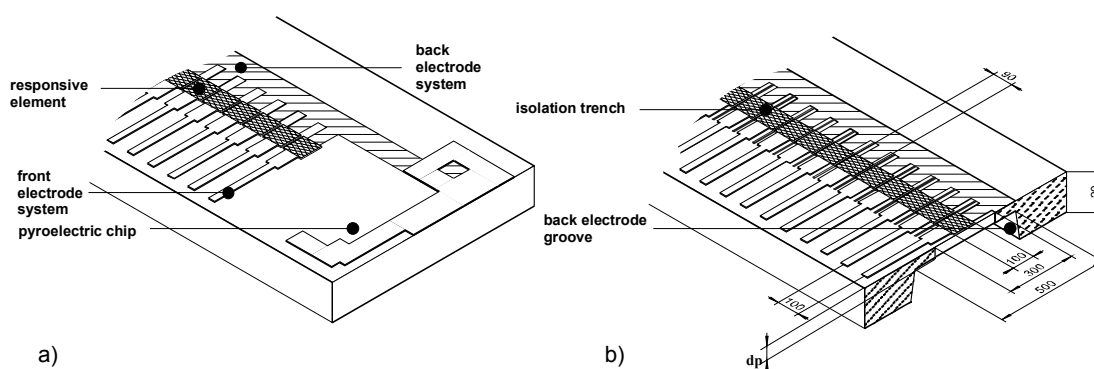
Chip layout with typical dimensions (µm) a) standard chip (only mechanical polishing) b) ion-beam-etched chip
